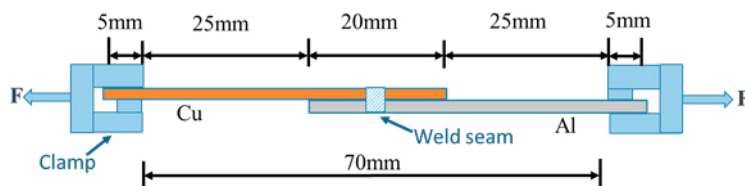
Schematic of Cu-Al laser welded specimen for tensile shear test setup.
